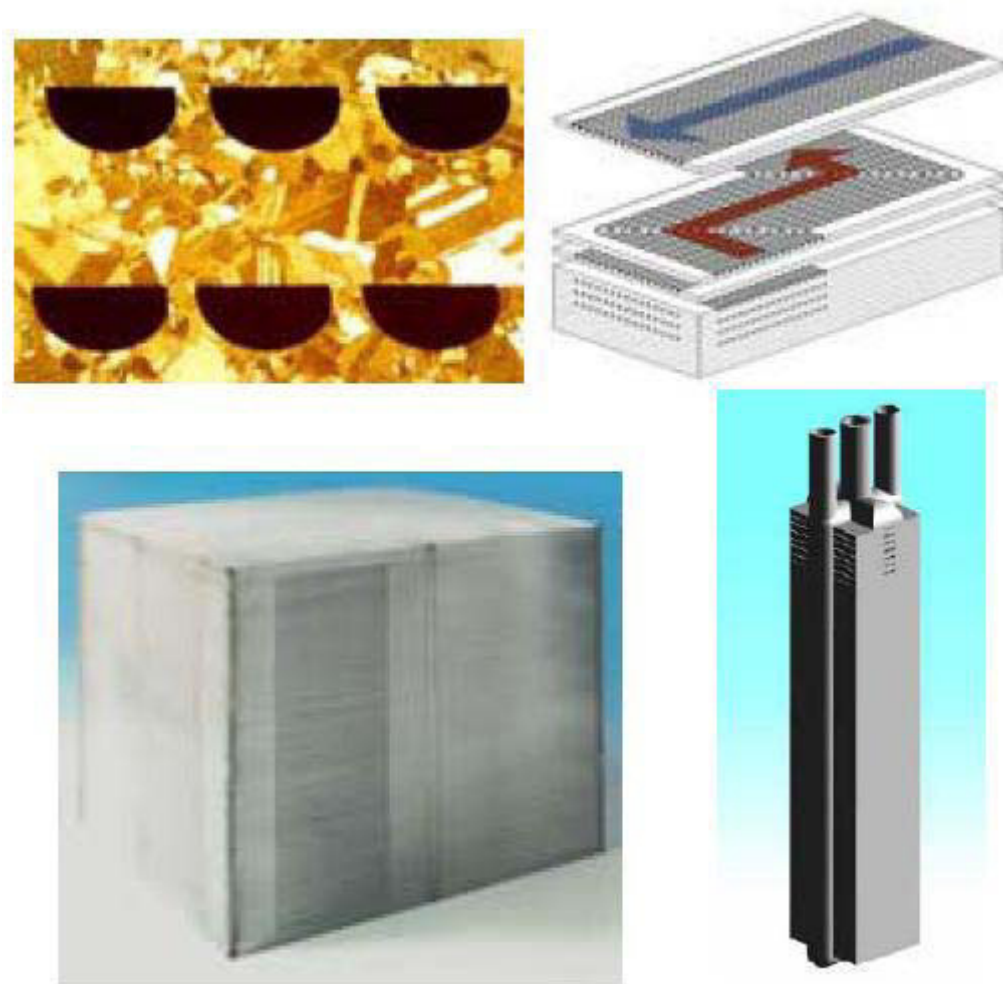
Printed Circuit Heat Exchanger, PCHE (source: HEATRIC) A heat exchanger module is composed of metal plate layers containing alternately coolant channels for the primary and for the secondary fluid flowing (e.g.) counter to each other (top right).
